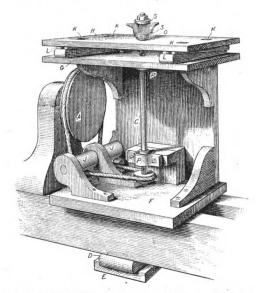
Molding Machine Attachment for Wood Turning Lathe.
